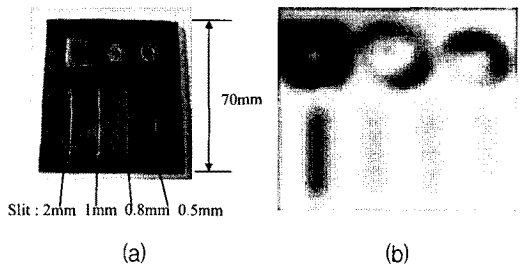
C-scan test of the test specimen with loose parts and slits; (a) Test specimen (b) C-scan image
